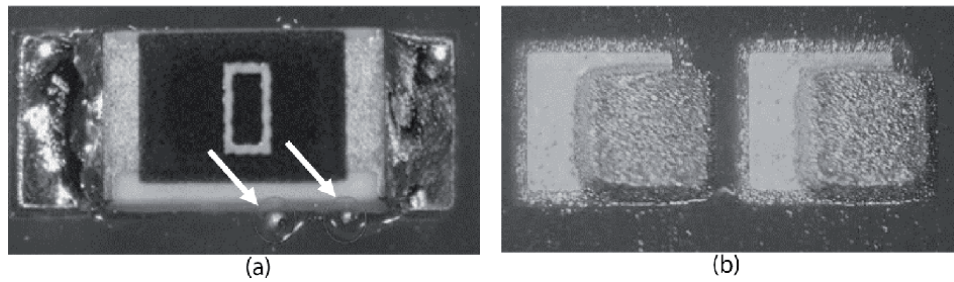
(a) Solder alloy balls occurring next to the component's package. (b) Inaccurate deposition of solder paste with regard to the solder pads.
